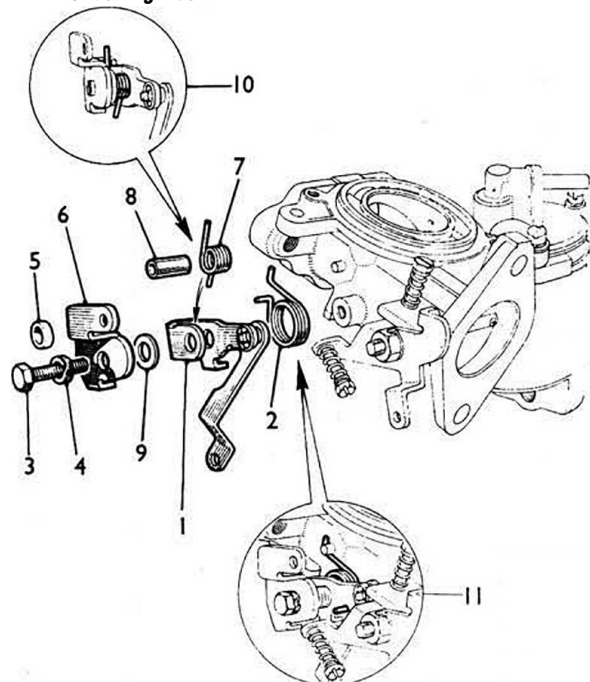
DISMANTLING THE HS6 CARBURETTOR - STAGE 4
